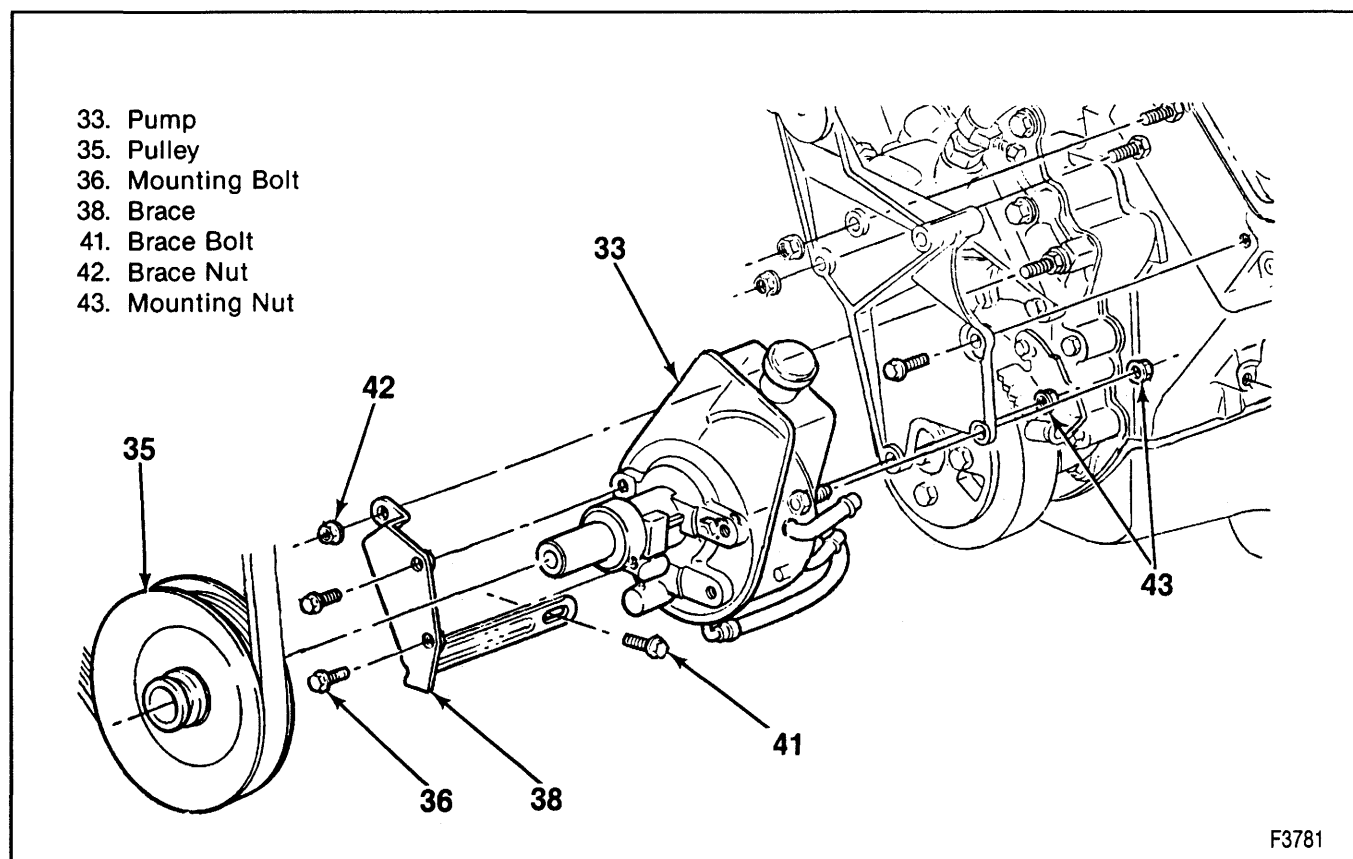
Power Steering Pump Mounting (6.5L Diesel Engines)
